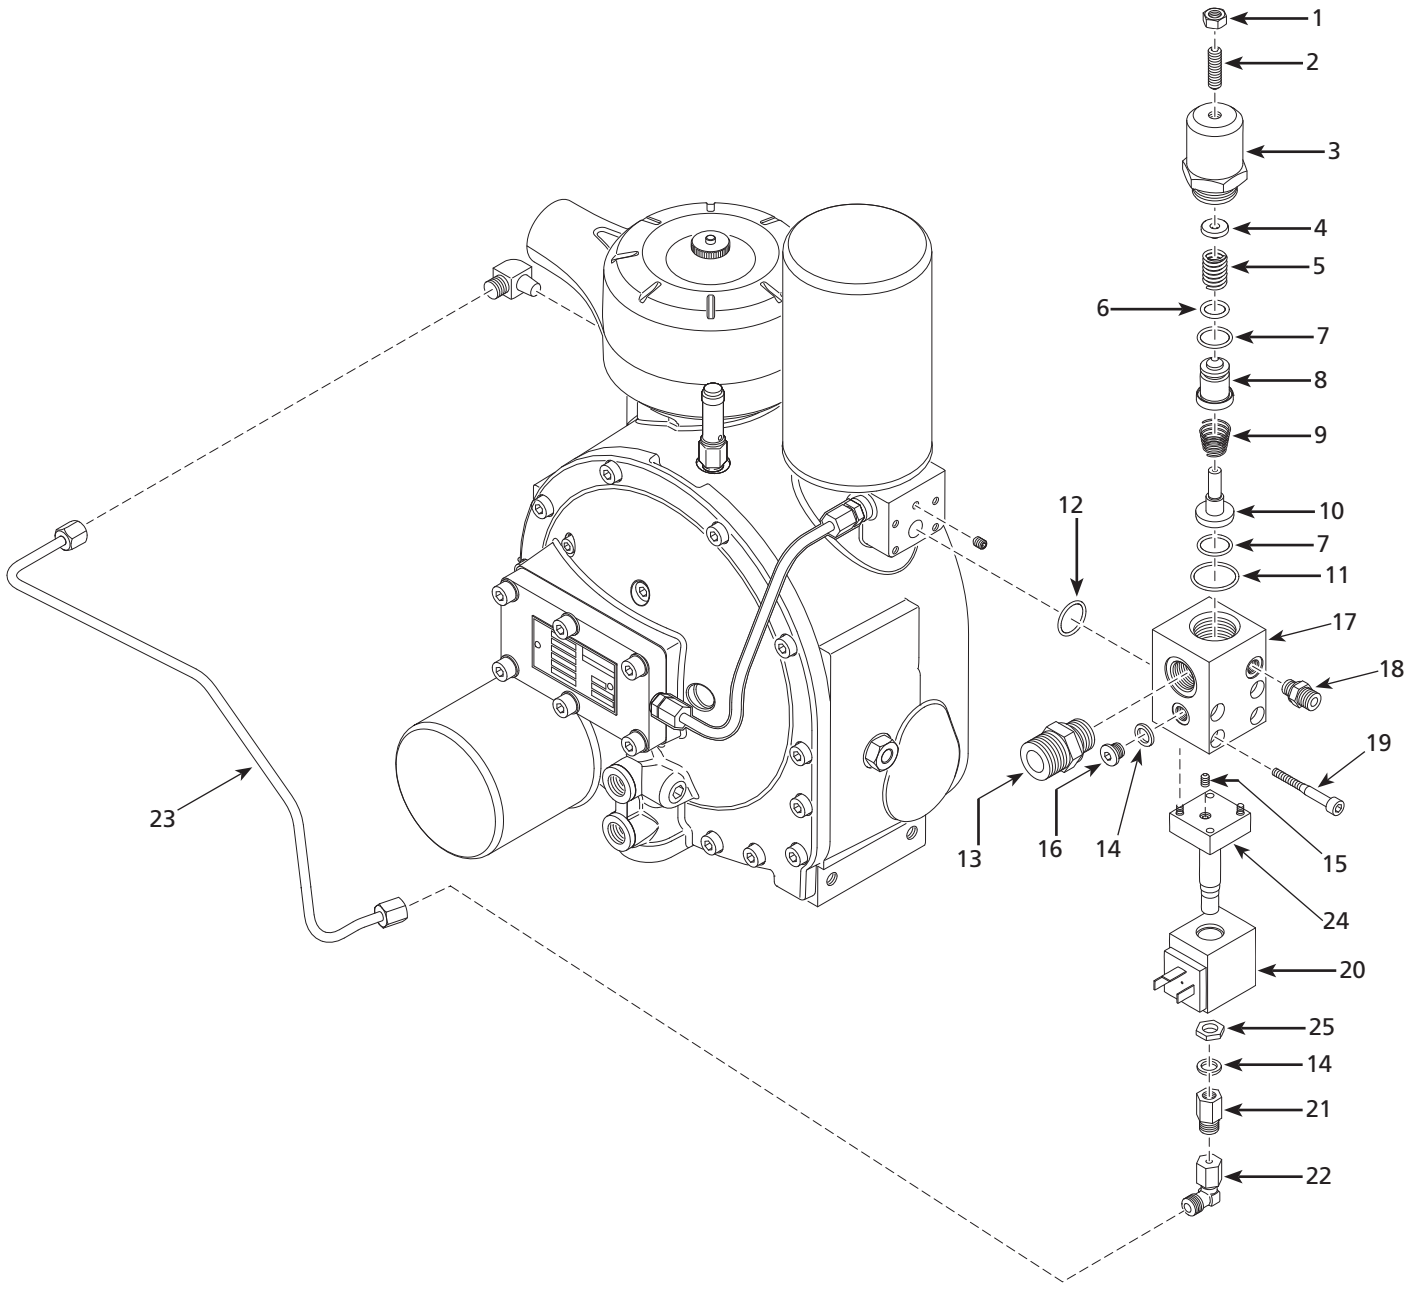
Repair Parts Illustration for 5 HP - 10 HP Rotary Screw Manifold Assembly
